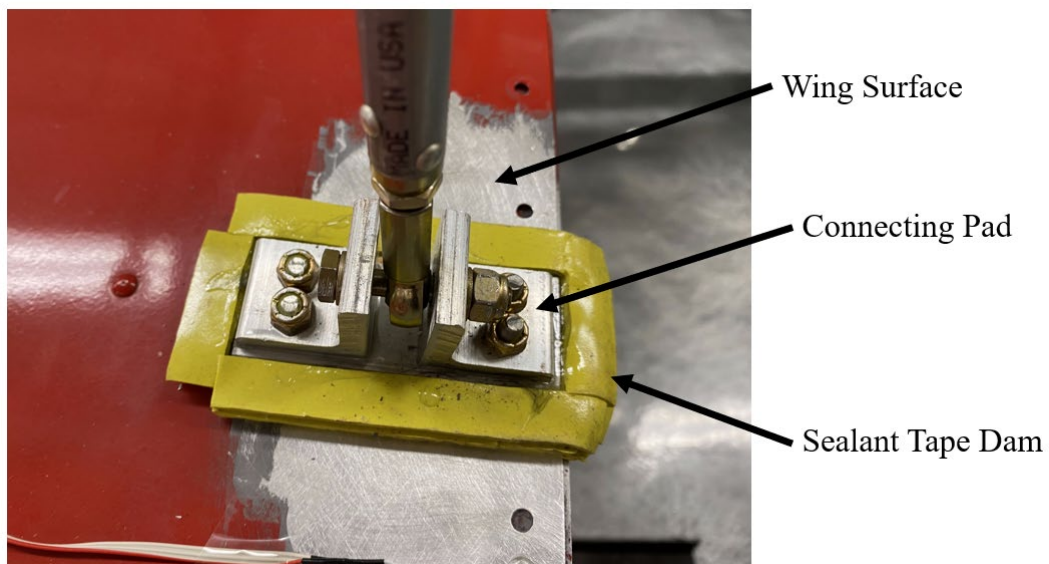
Connecting Pad Adhered to the Wing Surface.
